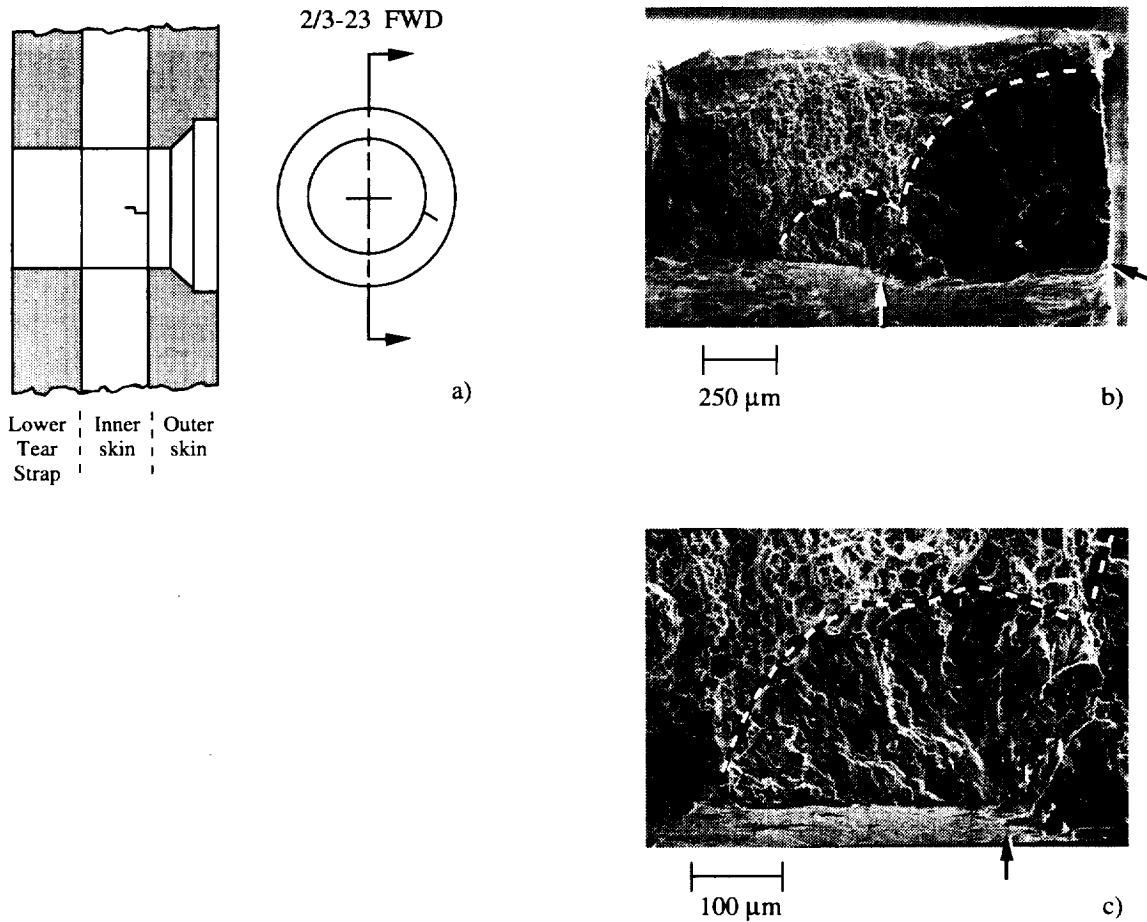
a) The schematic shows the rivet hole 2/3-23 configuration and the location of the inner skin fatigue crack oriented in the forward direction and below the 3 o'clock position. b) The SEM micrograph shows a fatigue crack fracture surface located at the outboard corner of the rivet hole contained in the inner skin. The dashed line marks the fatigue crack front showing that a corner crack and surface crack located in the rivet hole had coalesced. Arrows mark the likely sites of crack initiation. c) The SEM micrograph shows the portion of the fatigue crack located at mid thickness at high magnification. The arrow marks the crack initiation site and the dashed line marks the fatigue crack front.
